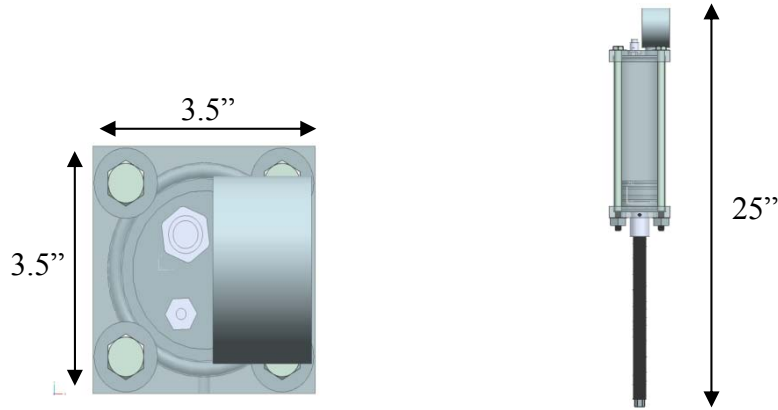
Dimensioned drawings showing outer dimensions of device
